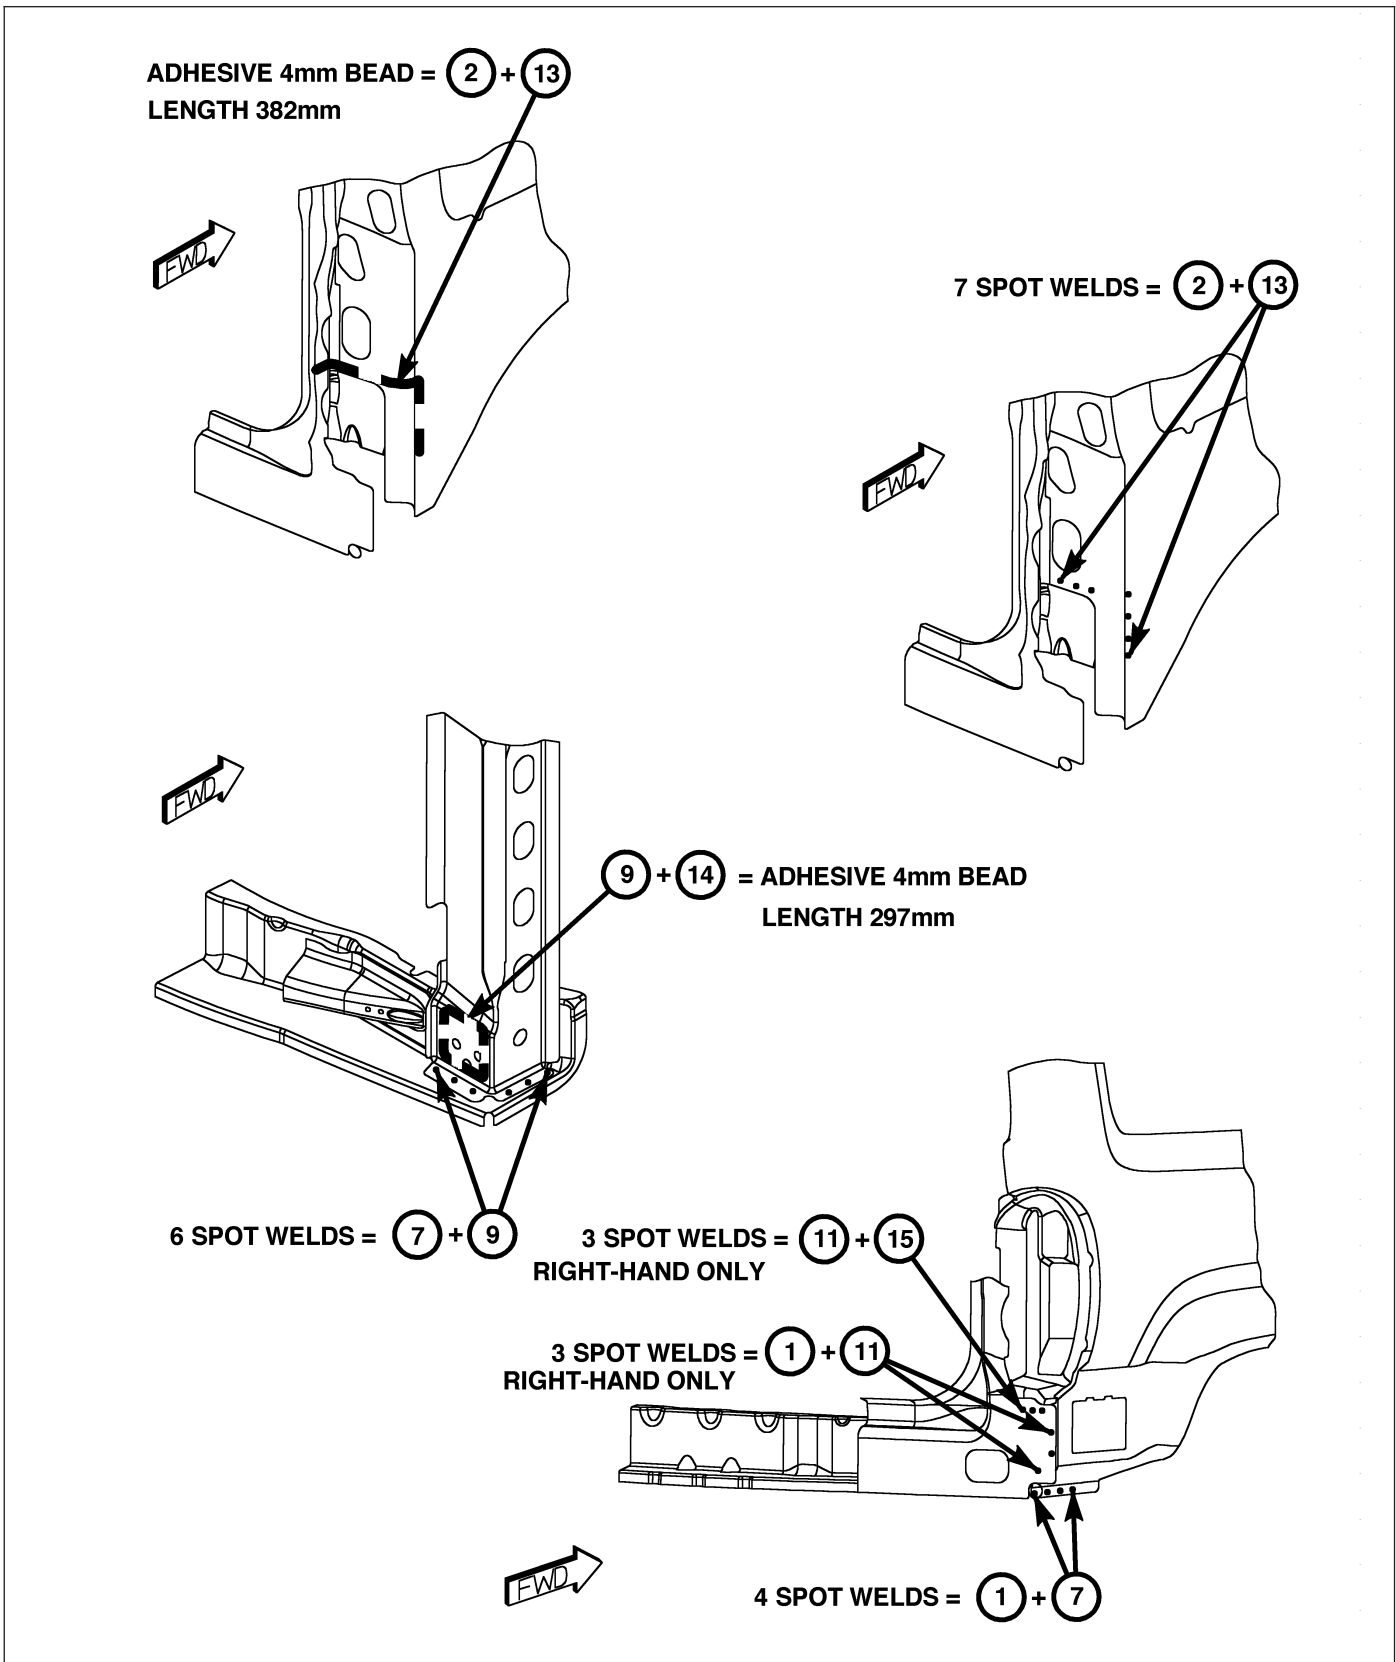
SWING GATE OPENING PANEL; D-PILLAR LOWER TO FLOOR GUSSET; GATE OPENING REINFORCEMENT
